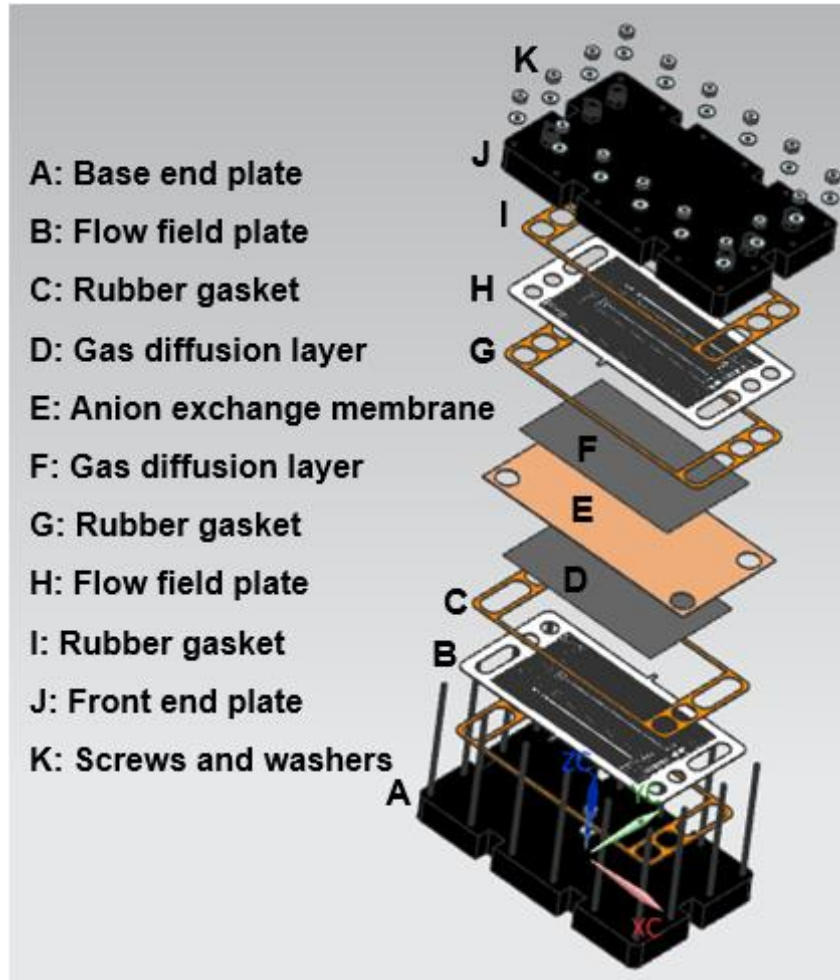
Exploded view of the single cell fuel cell assembly
